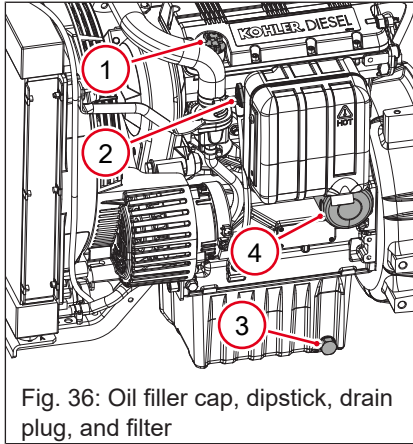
Oil filler cap, dipstick, drain plug, and filter
